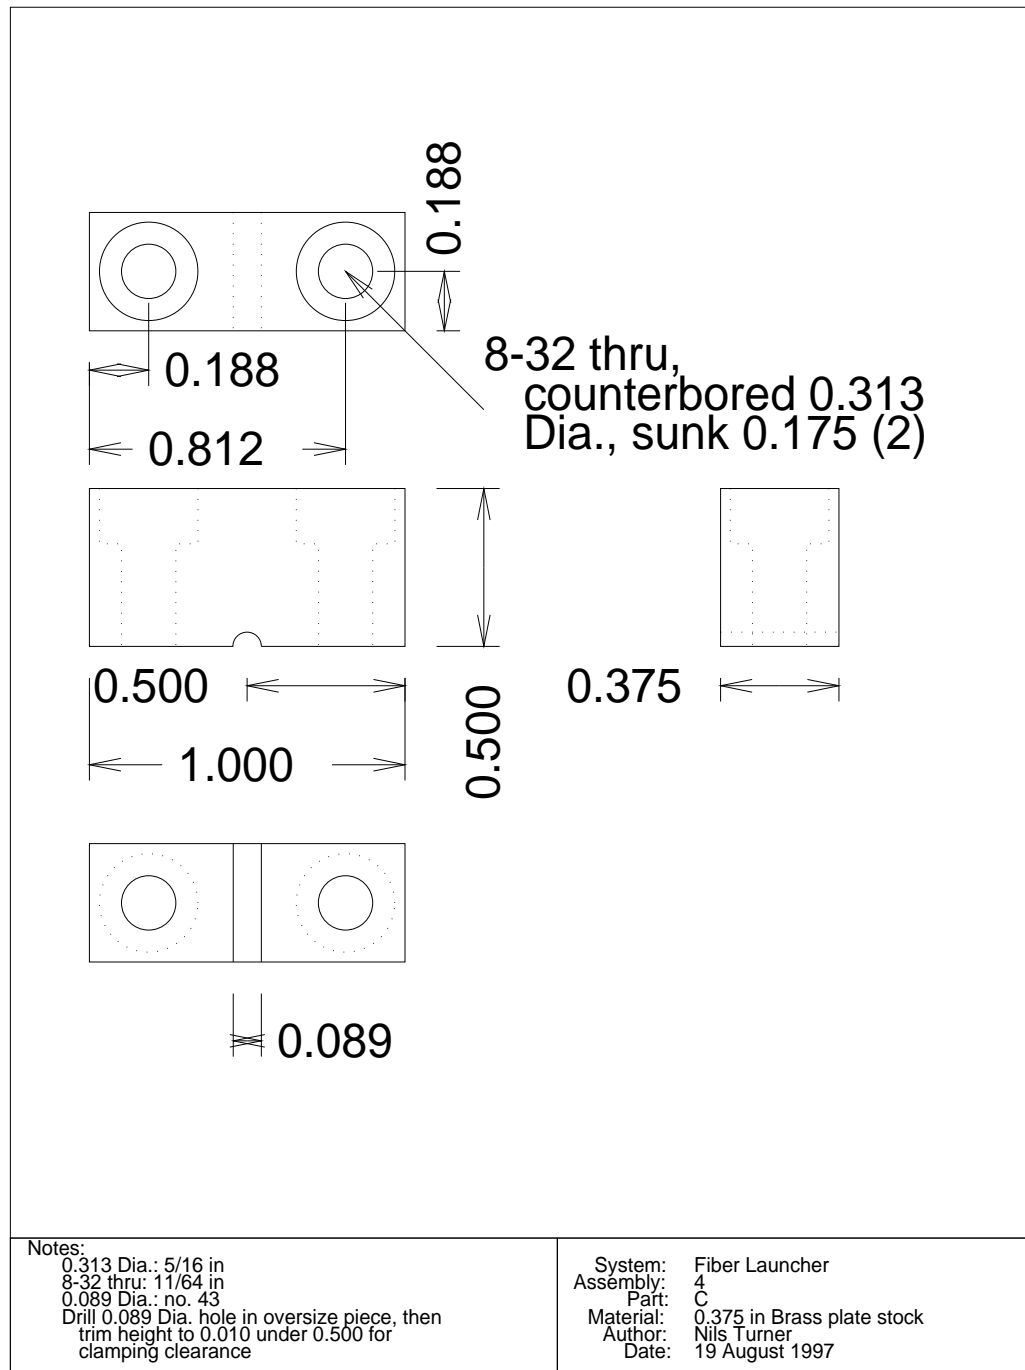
Fiber Launcher, Part 4C*. This part is a piece of the strand cable clamp.
